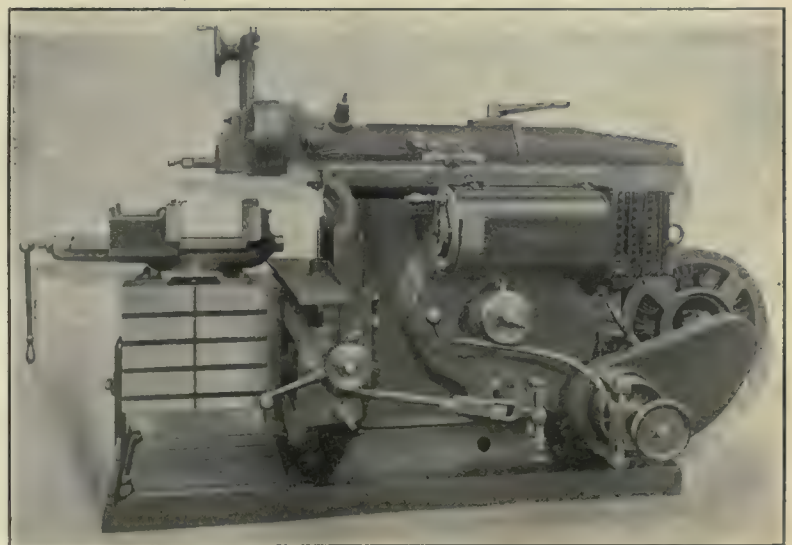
Gould and Eberhardt-Shaper Equipped with Westinghouse Motor.
